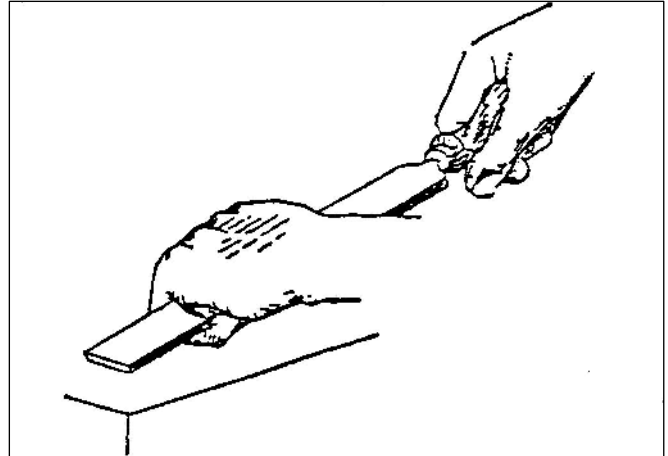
The scraper cuts on the forward stroke. The pressure should therefore be relieved on the back stroke
